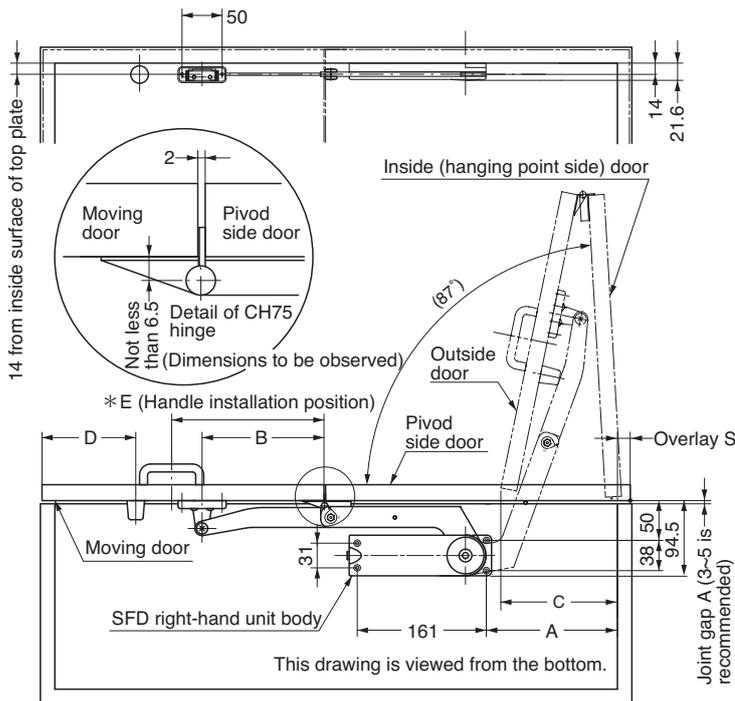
Mounting dimensions for overlay specification (for right-hand side)
